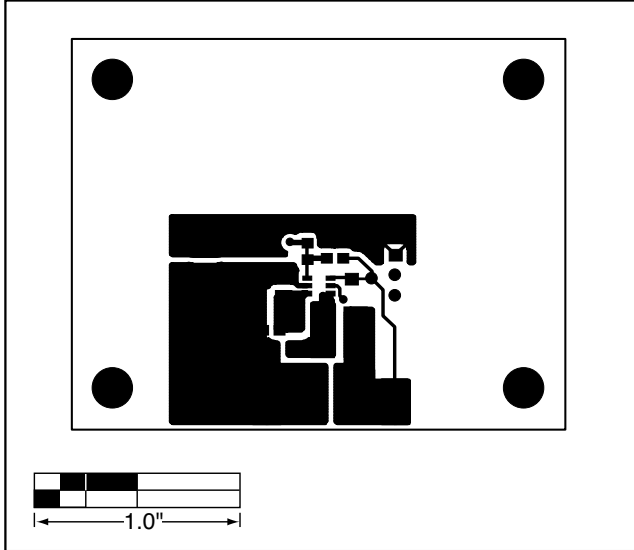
MAX1837 EV Kit PC Board Layout—Component Side
